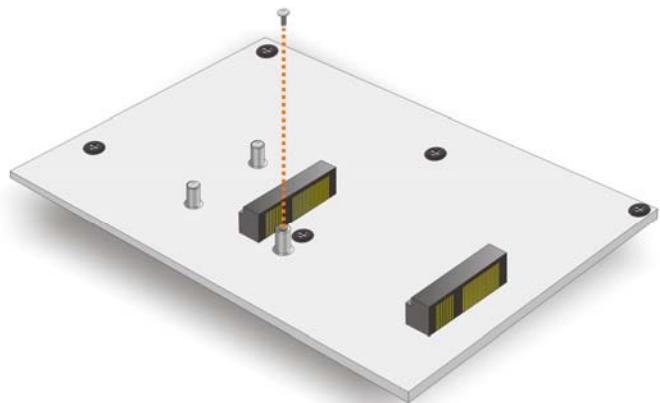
Remove the Retention Screw for the Full-size PCIe Mini Card
